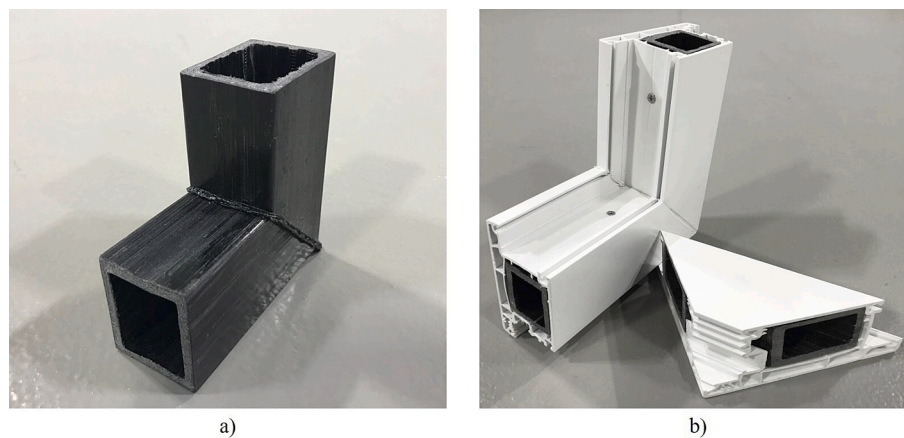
Use of thermoplastic composite tube as the reinforcing element in the design of window and door structures: (a) welded angle joint of thermoplastic tubes, (b) the assembly of the thermoplastic tube and PVC profile.
